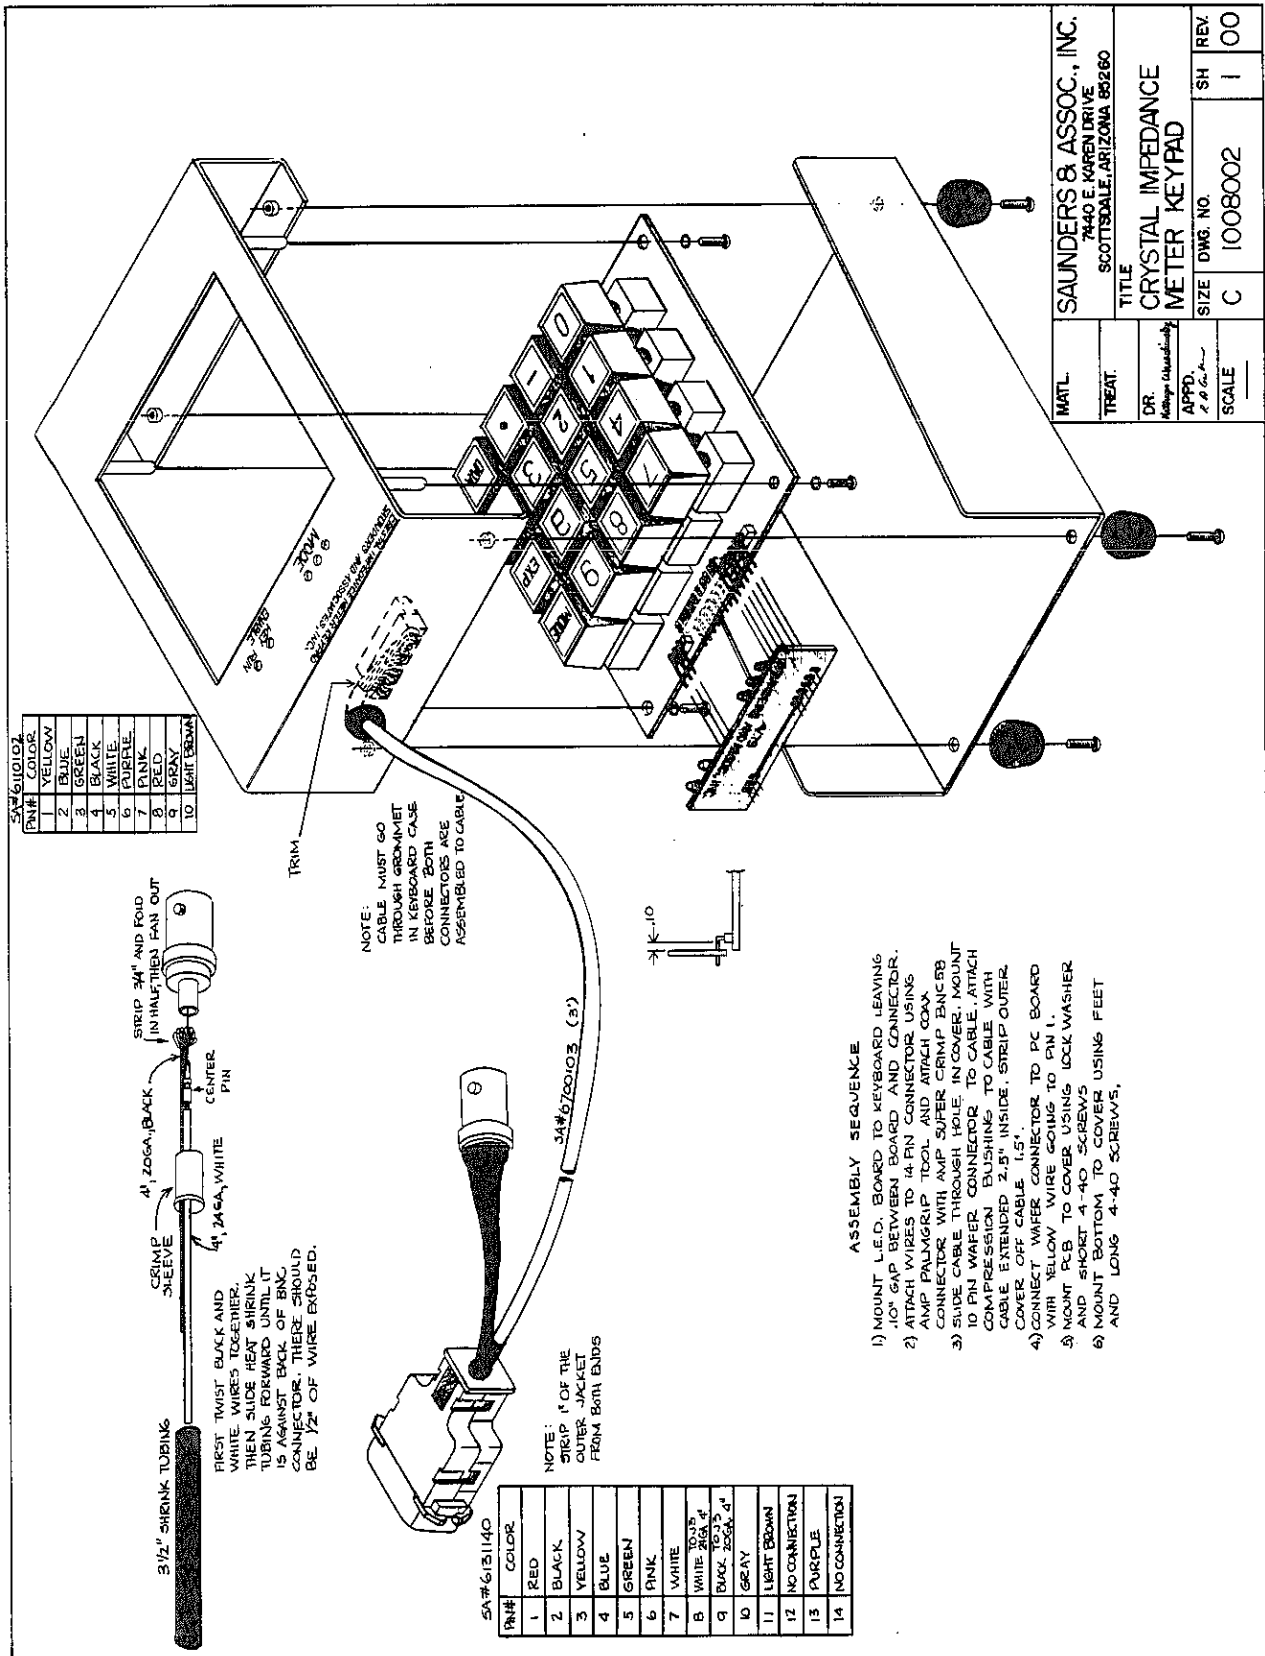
KEYPAD CHASSIS ASSEMBLY
